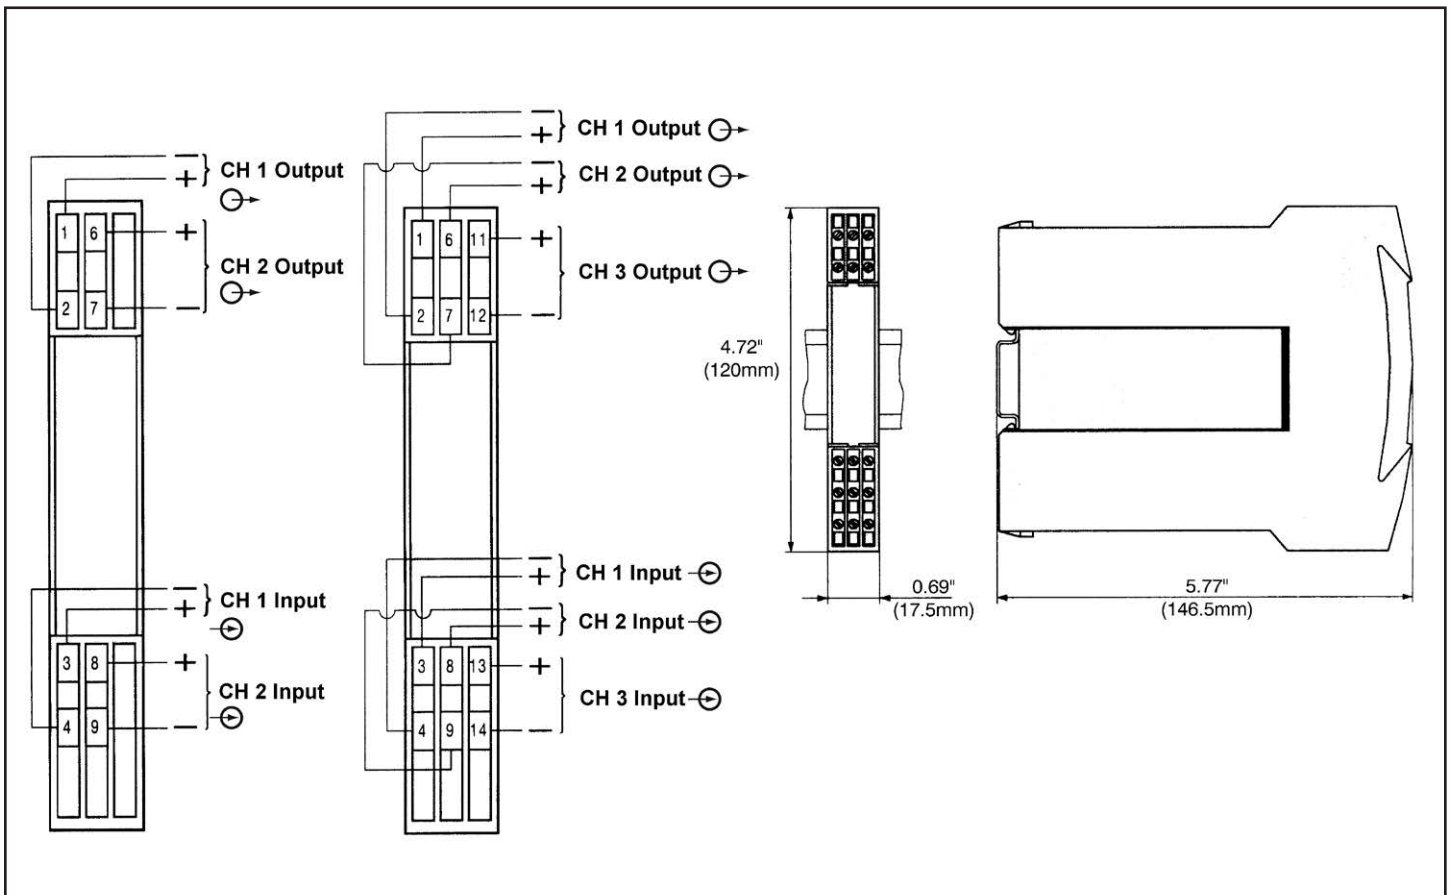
DSCL22-11,-21 Wiring and Dimensions
